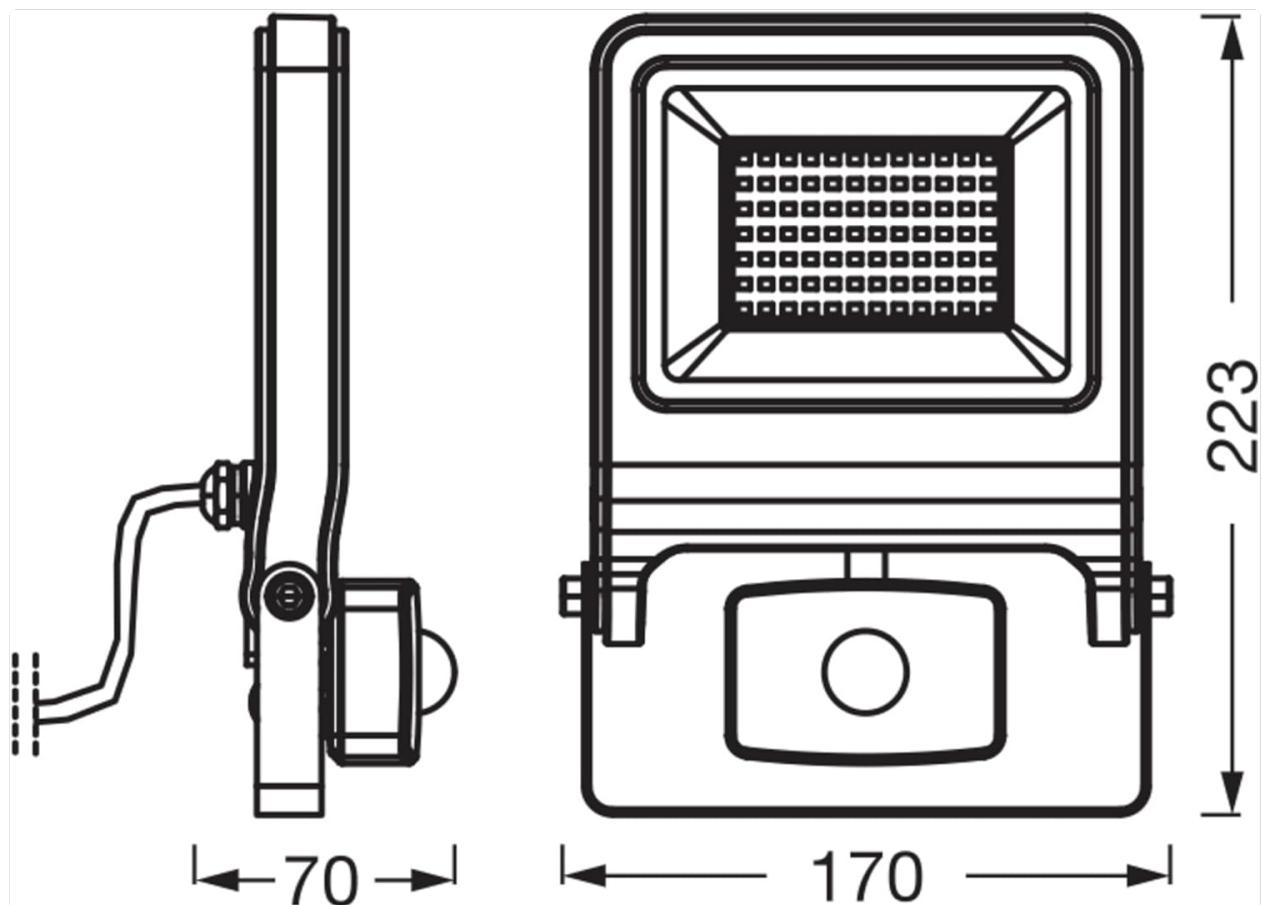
Dimensional drawing of the OSRAM ENDURA FLOOD PC 50W LED Projector, showing measurements in millimeters.
